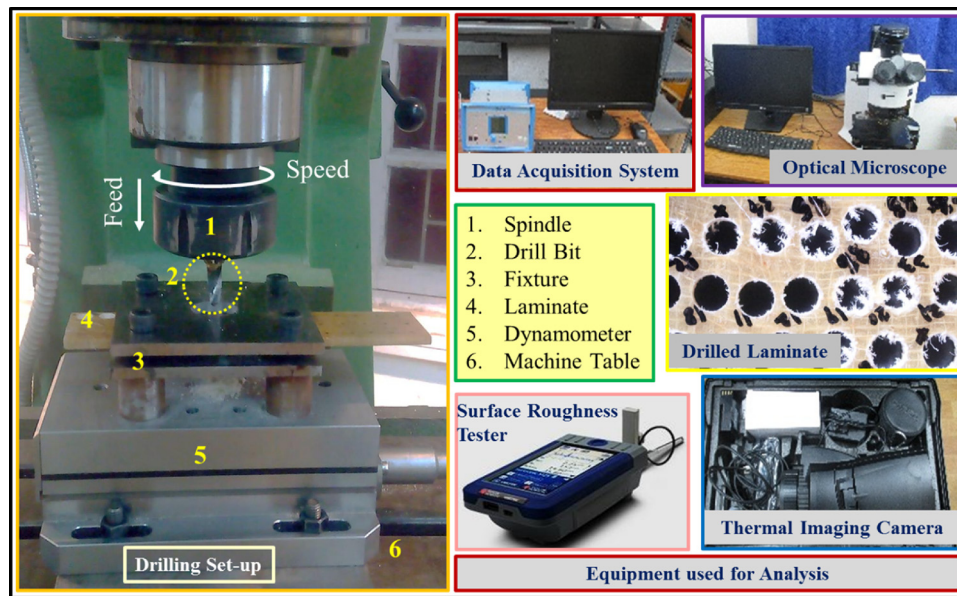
Drilling set-up and the equipment used to analyse the drilled hole.
